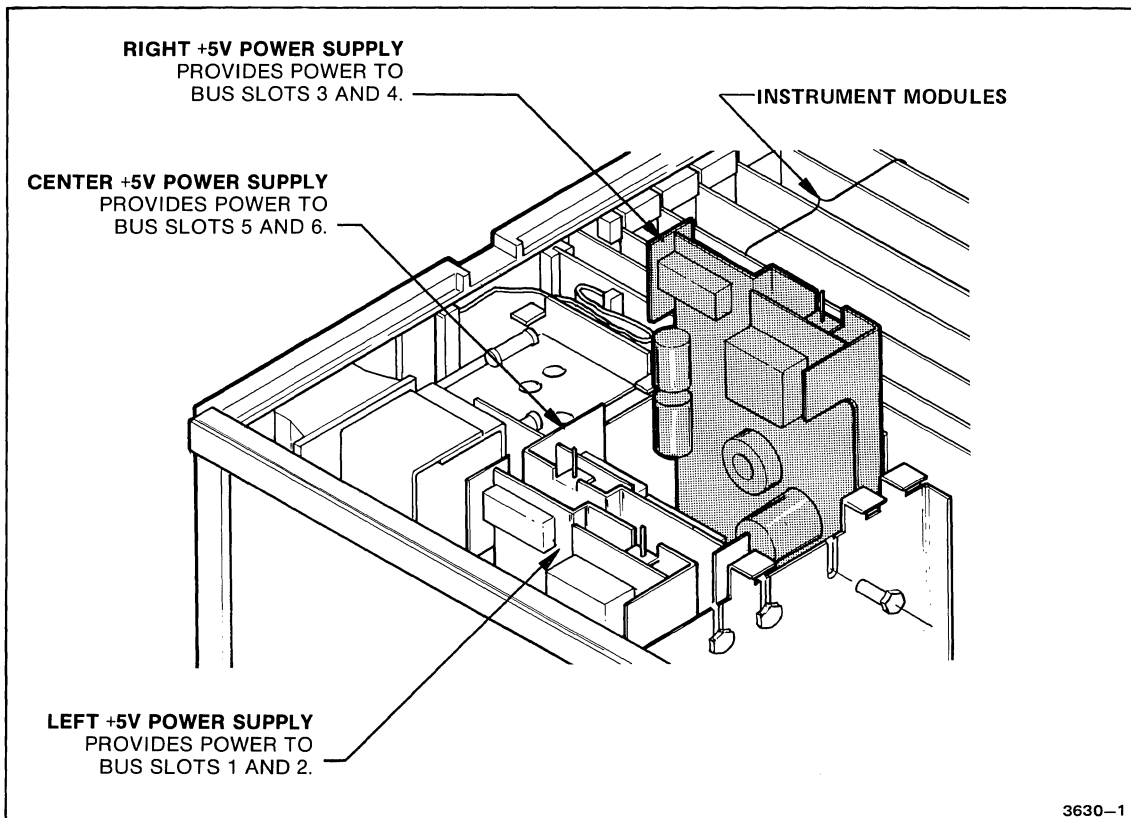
Removing a +5 V power supply module. (This figure shows the Monochrome DAS. The Color DAS is similar.)
